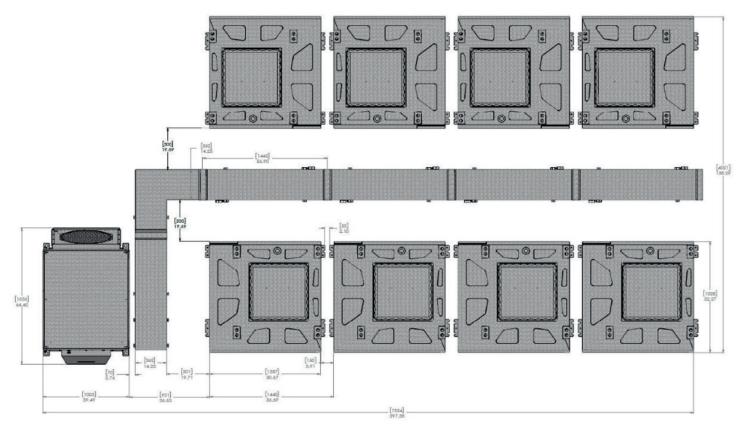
BESS Assembly top view. In-Line or Back-to-Back Possible.
